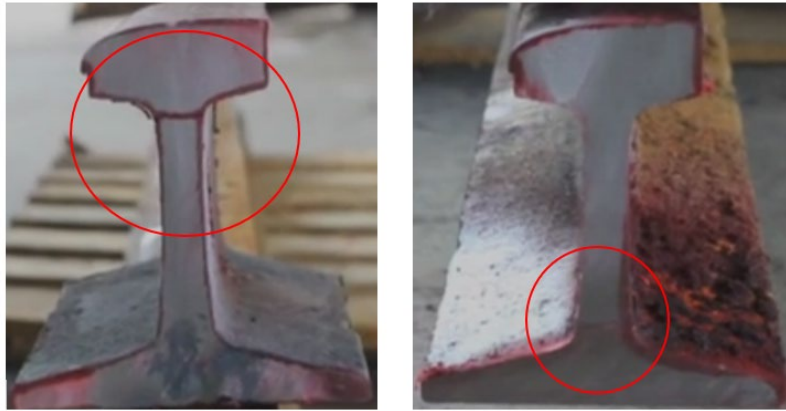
Figure SUB-PART D – 51 – Dye Penetrant Developer Indicating Rail Defect Remain
